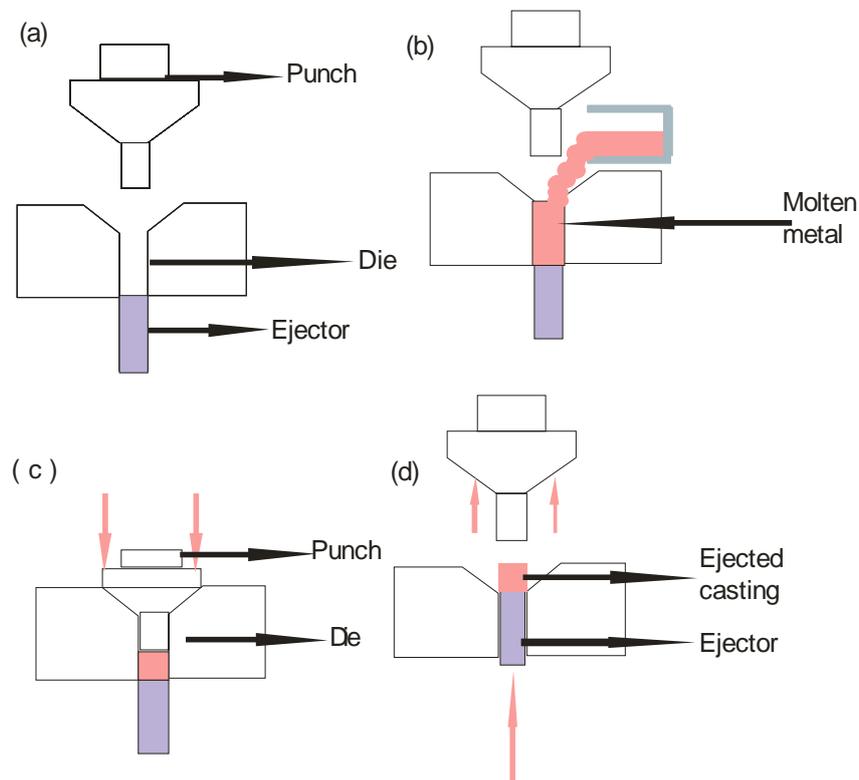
Schematic, showing the sequence of steps during squeeze casting operation (a) Pre-heated die and punch. (b) Molten metal poured into the die cavity. (c) Application of squeeze pressure. (d) Ejection of solidified casting
